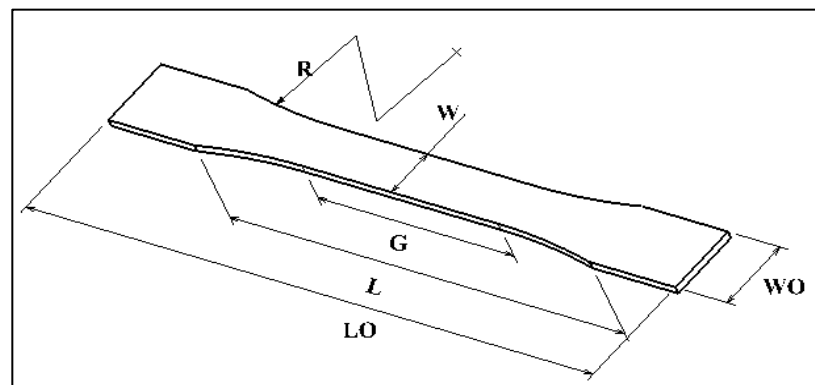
The dimensions of the tensile specimens according to ASTM 638-10 [2]
